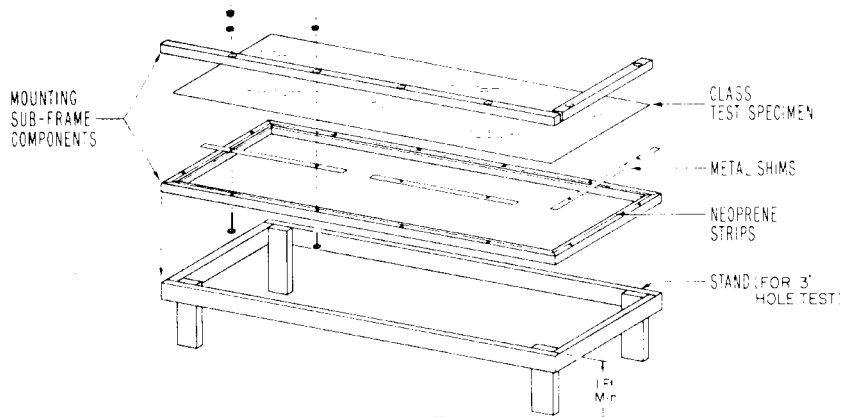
GLASS TEST SPECIMEN MOUNTING SUB-FRAME (EXPLODED) & STAND
